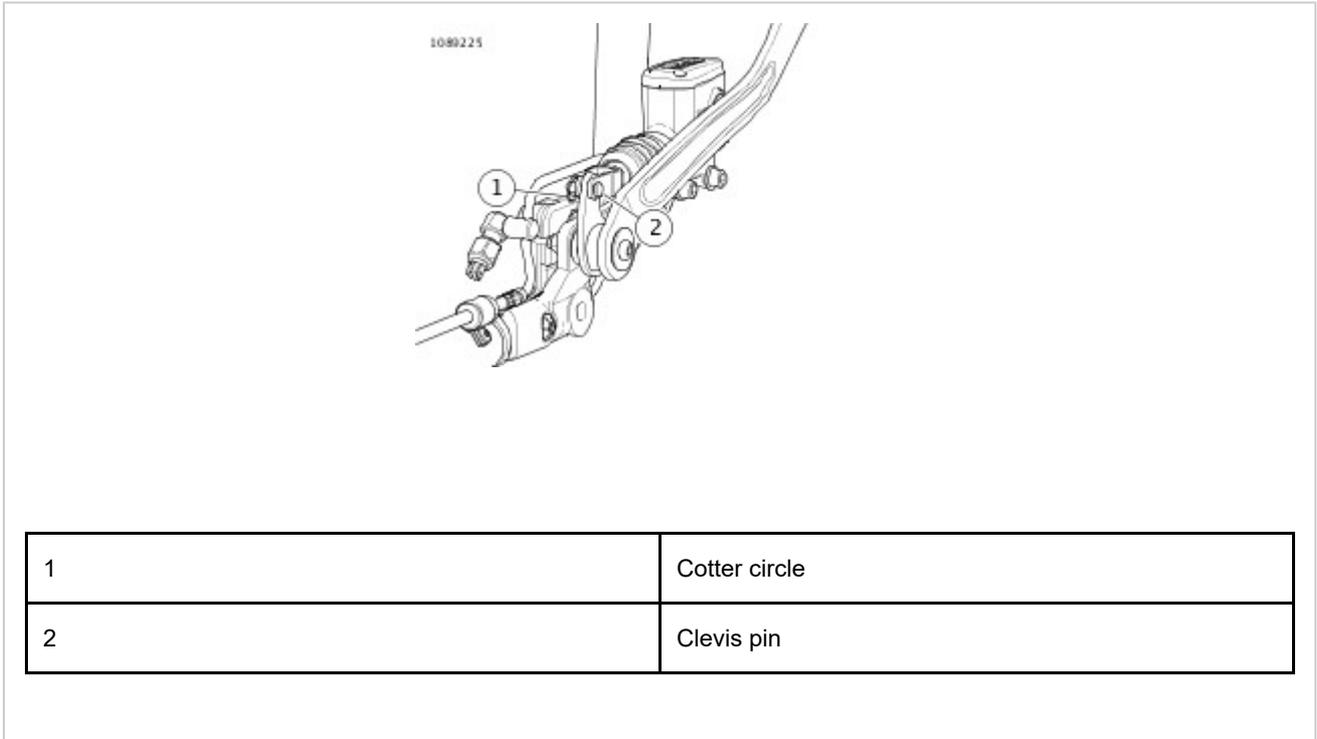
Rear Master Cylinder - Rear View: (exhaust remove for clarity)
